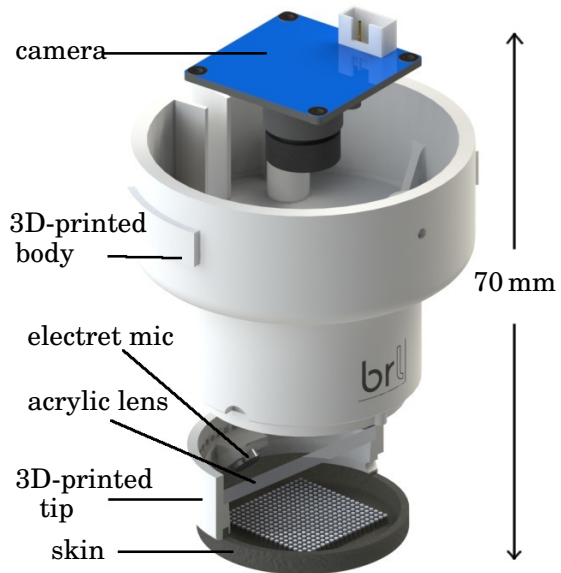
Exploded view of the modified TacTip design. The dimension (70 mm) refers to the ‘un-exploded’ size.
